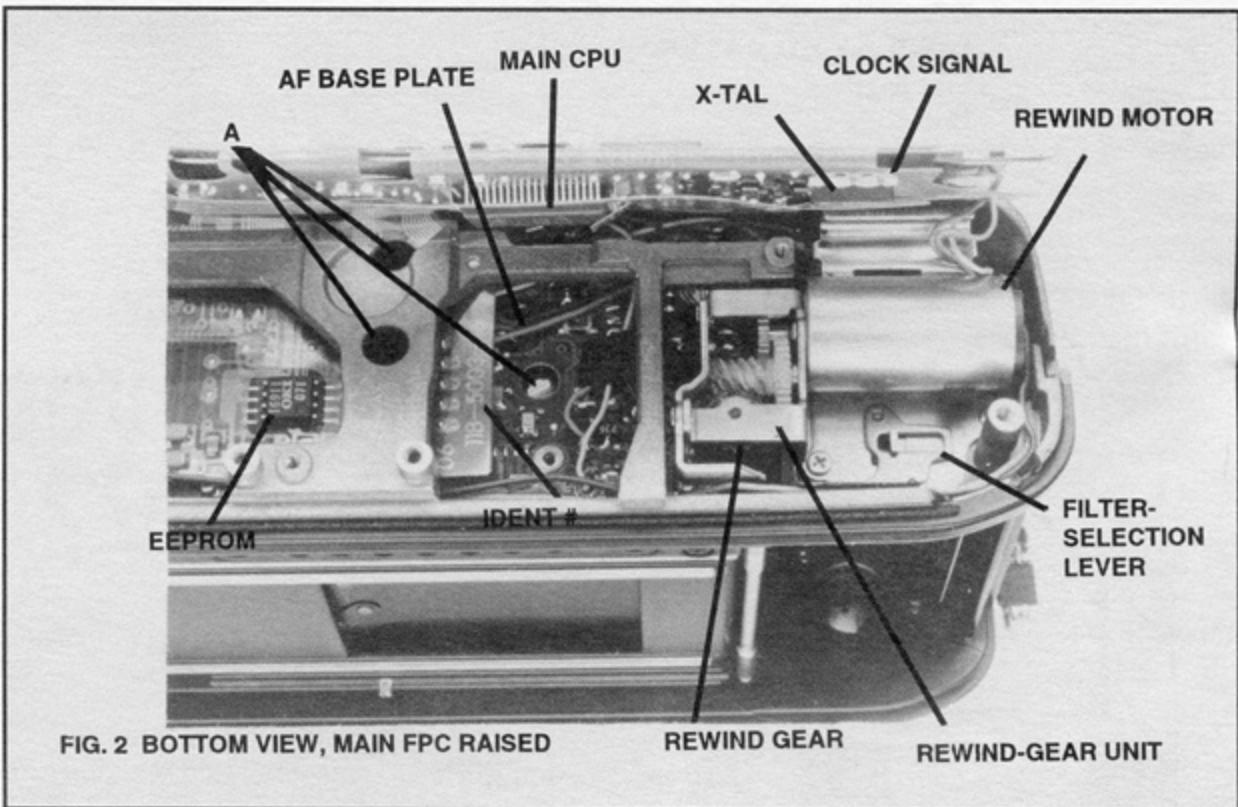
BOTTOM VIEW, MAIN FPC RAISED
